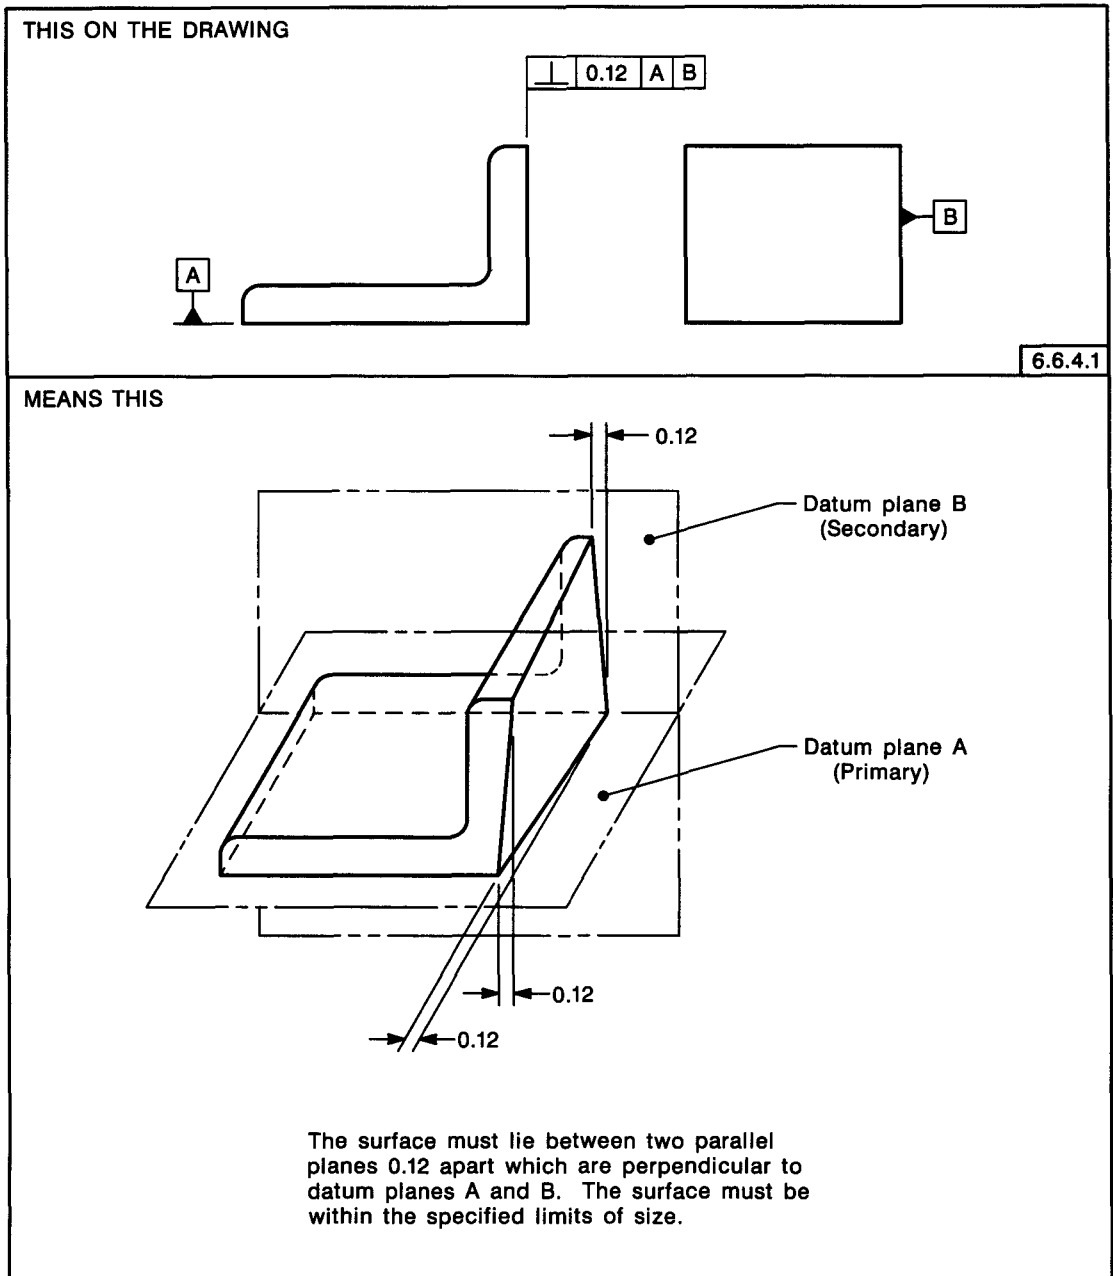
SPECIFYING PERPENDICULARITY FOR A PLANE SURFACE RELATIVE TO TWO DATUMS
